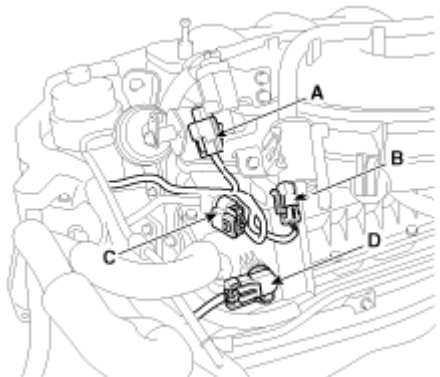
Identifying Connectors For VIS Solenoid Valve, PCSV, RH Oxygen Sensor, & RH Exhaust Camshaft CMP Sensor
